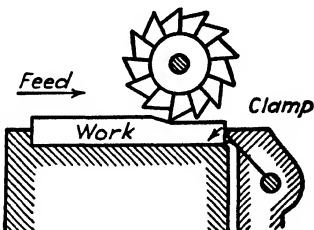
Pressure of cut should always be against solid part of fixture.
